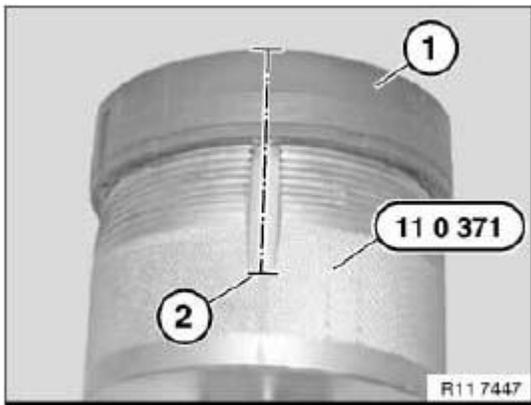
Identifying Crankshaft Seal At Cutting Line
